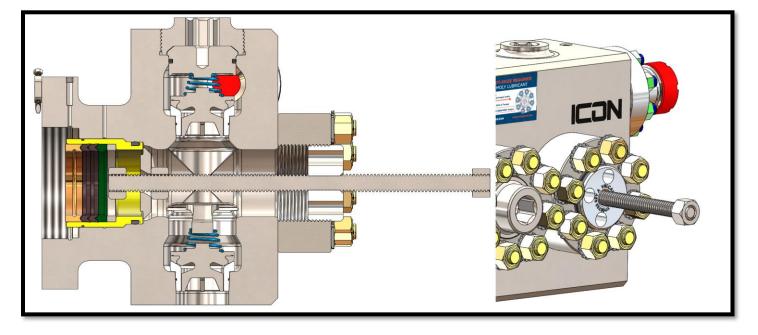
Wear Sleeve Removal Tool Installed in Fluid end
